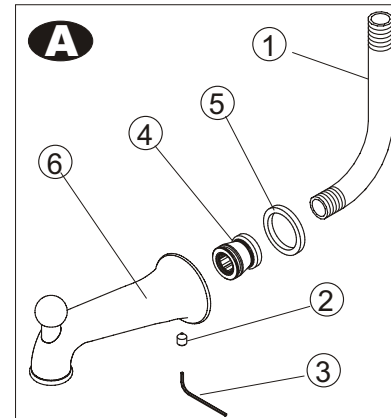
Fig. A - Remove cap that is in the bottom outlet, using a 15/16" wrench. Connect bottom outlet of thermostatic valve to curved pipe (1) with proper fittings. Remove the set screw (2) using the allen wrench (3). Install the 1/2" nipple (4) so that it is 1.03" (26.1mm) min and 1.36" (34.6mm) max in length from the wall (see fig.B). Position the rubber ring (5) on the backside of the spout and slide the spout onto the nipple (4). Press the spout (6) against the wall and tighten the clamp screw (2) into the spout (6) using the allen wrench (3). Flushing is required. See flushing instructions in page 6.
